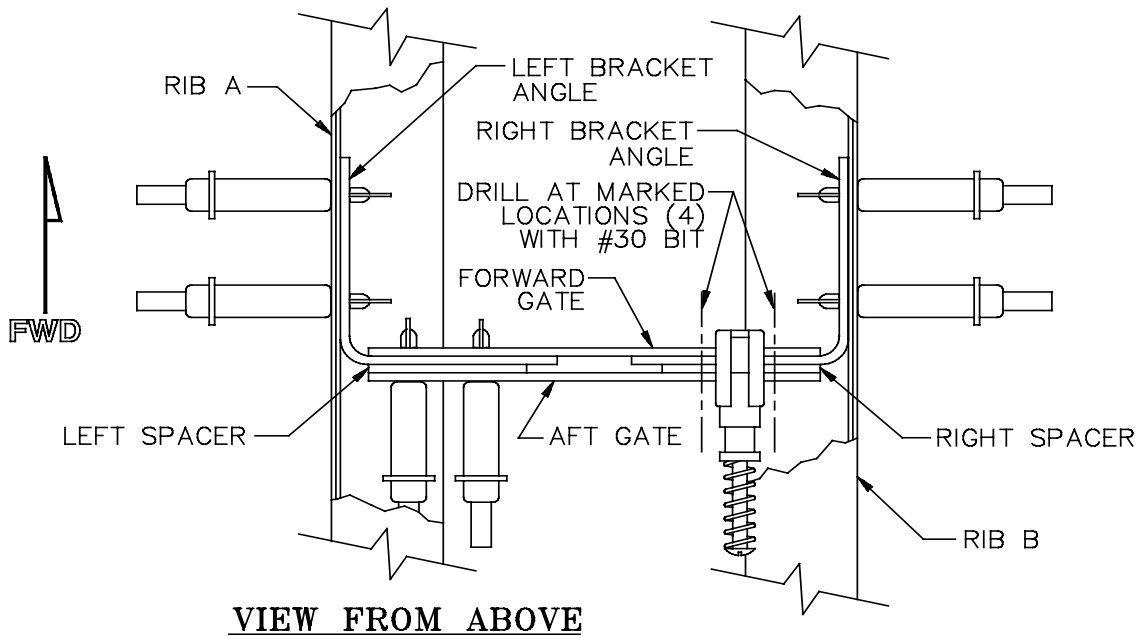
Drilling the Right-Side Trim Cable Bracket Rivet Holes
